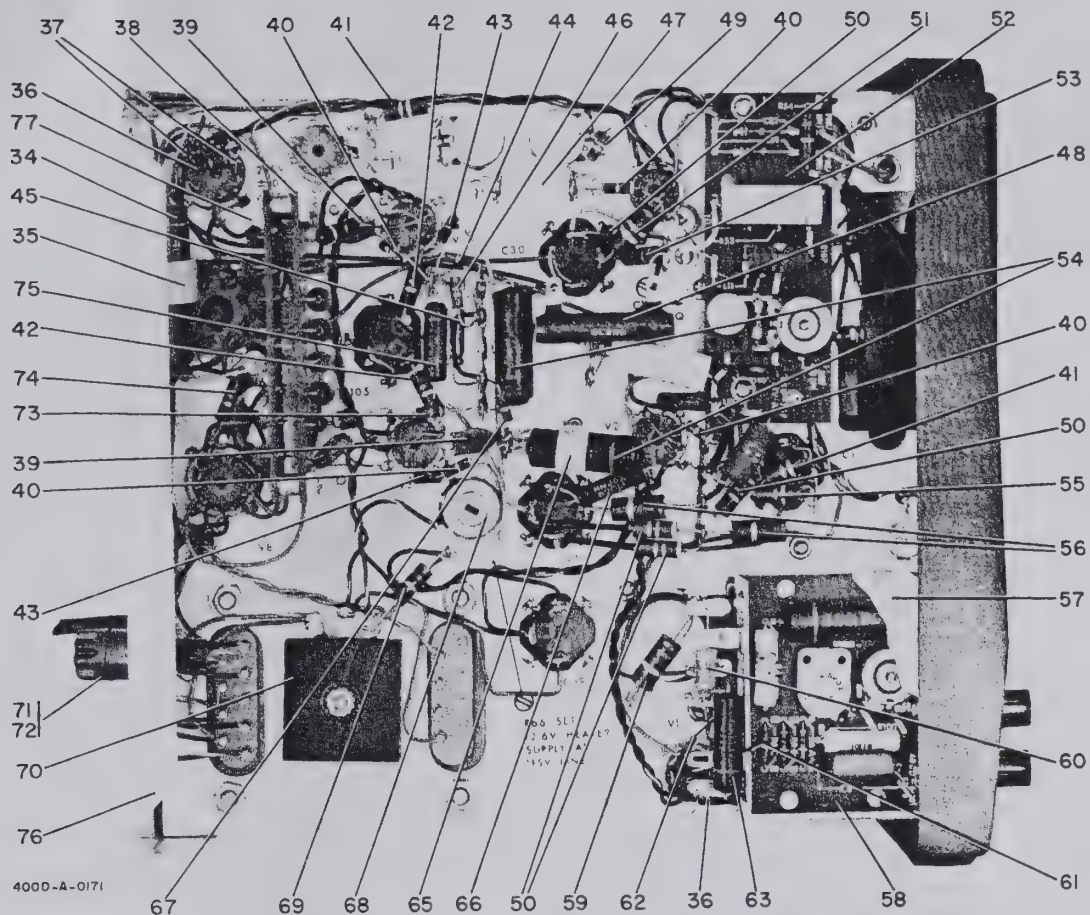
Main Chassis Assembly (Sheet 2 of 2)
